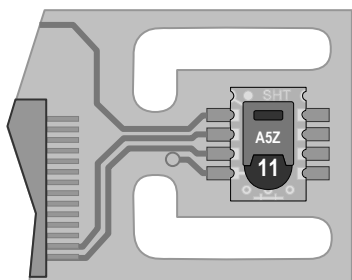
Top view of example of mounted SHT1x with slits milled into PCB to minimize heat transfer.
